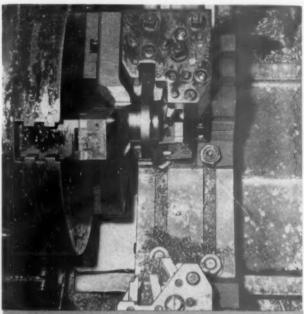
Rough and finish turning flange on camshaft. Note auxiliary tool block under standard block.
